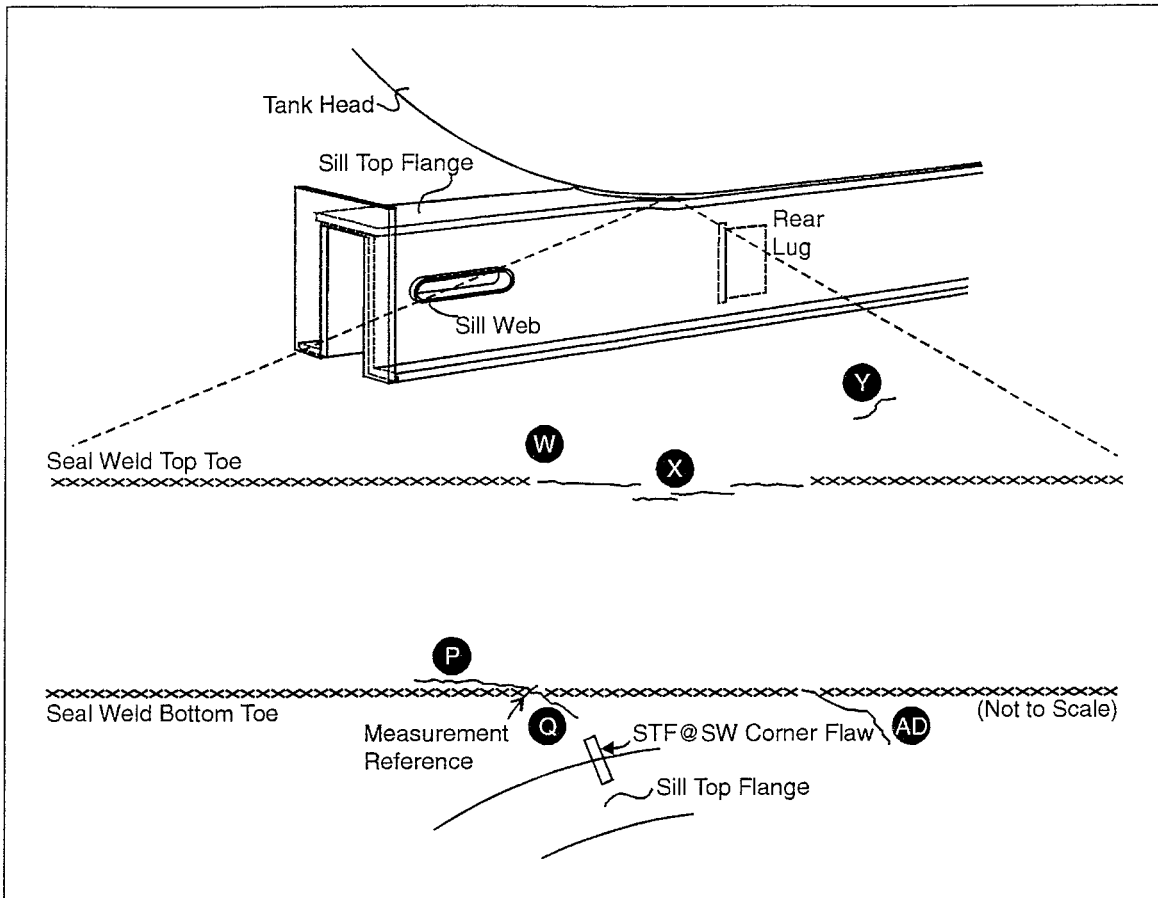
B-end Right Seal Weld Cracks and Preflaw
